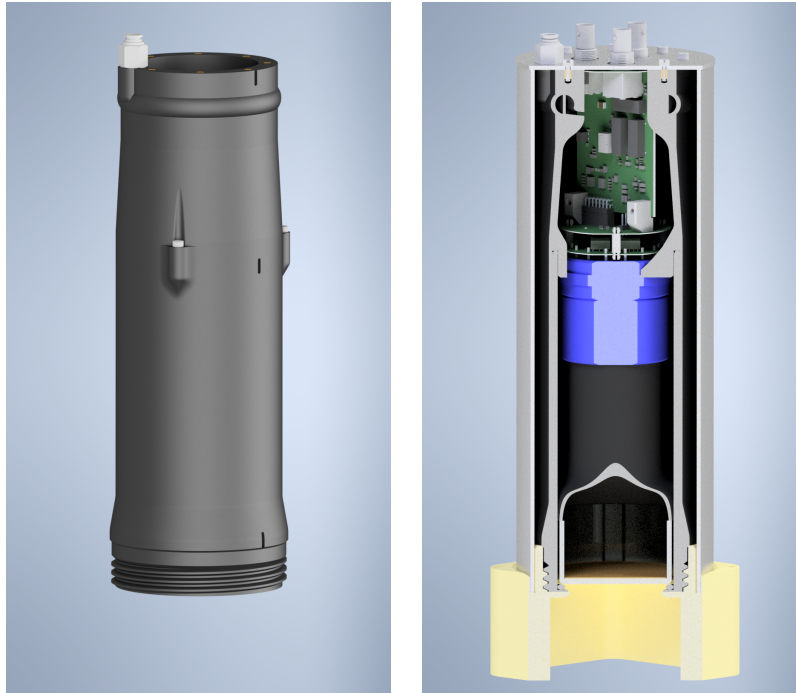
CAD renders of the PMT housing design showing external (left) and internal (right) features. On the right, the 3D-printed housing containing the PMT and front-end electronics is threaded into the 3D-printed LGPMT interface (yellow) with the aluminum outer tube and lid secured. The sliced view also shows the air flushing channels visible in the top 3D-printed piece.
